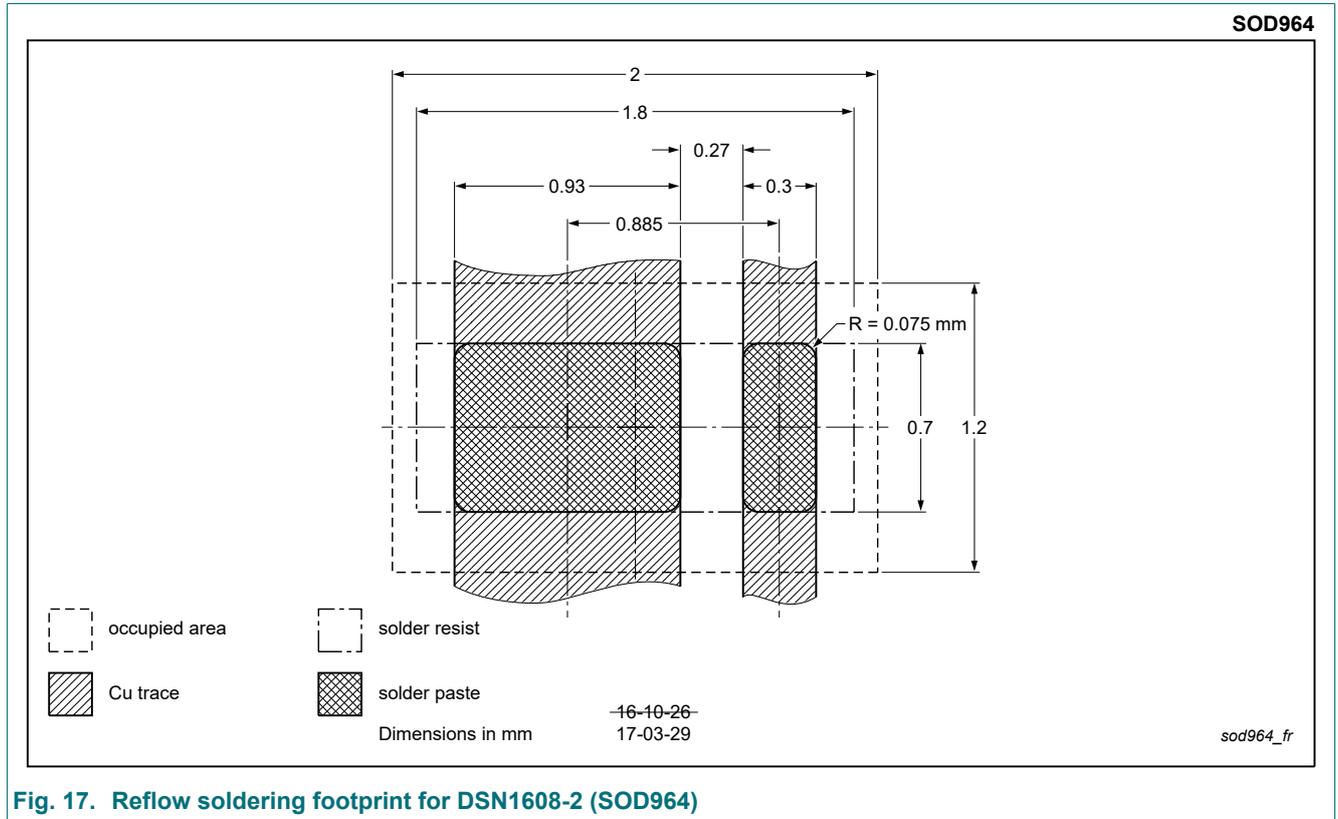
Reflow soldering footprint for DSN1608-2 (SOD964)
